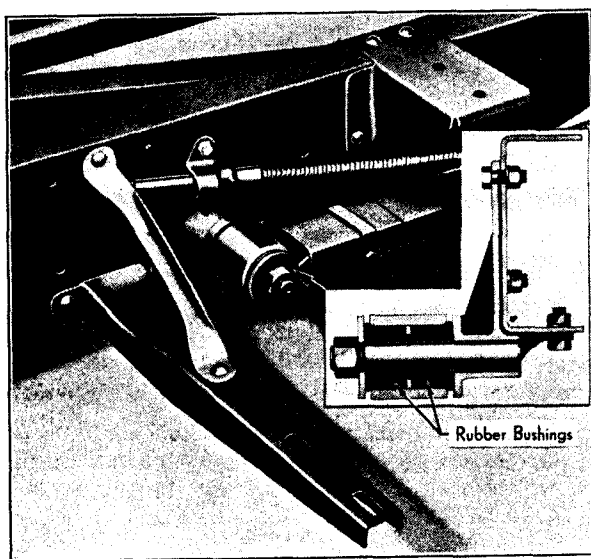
The front shackle of the rear springs is of the rubber bushing type
